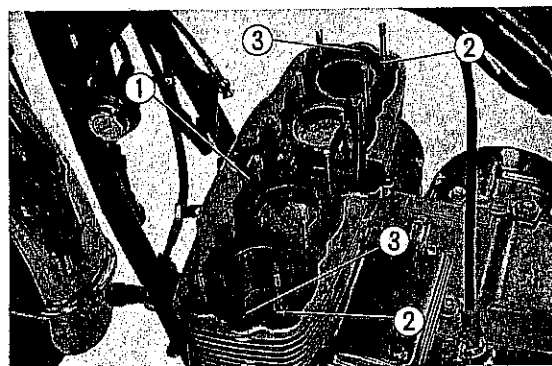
① Cylinder head gasket ② Dowel pins ③ O-rings
